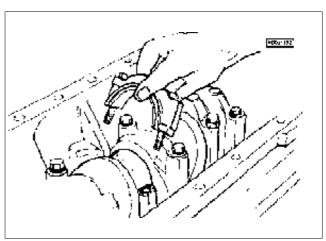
Fit the big end cap bearing shells in the related seats and then install the big end caps;
